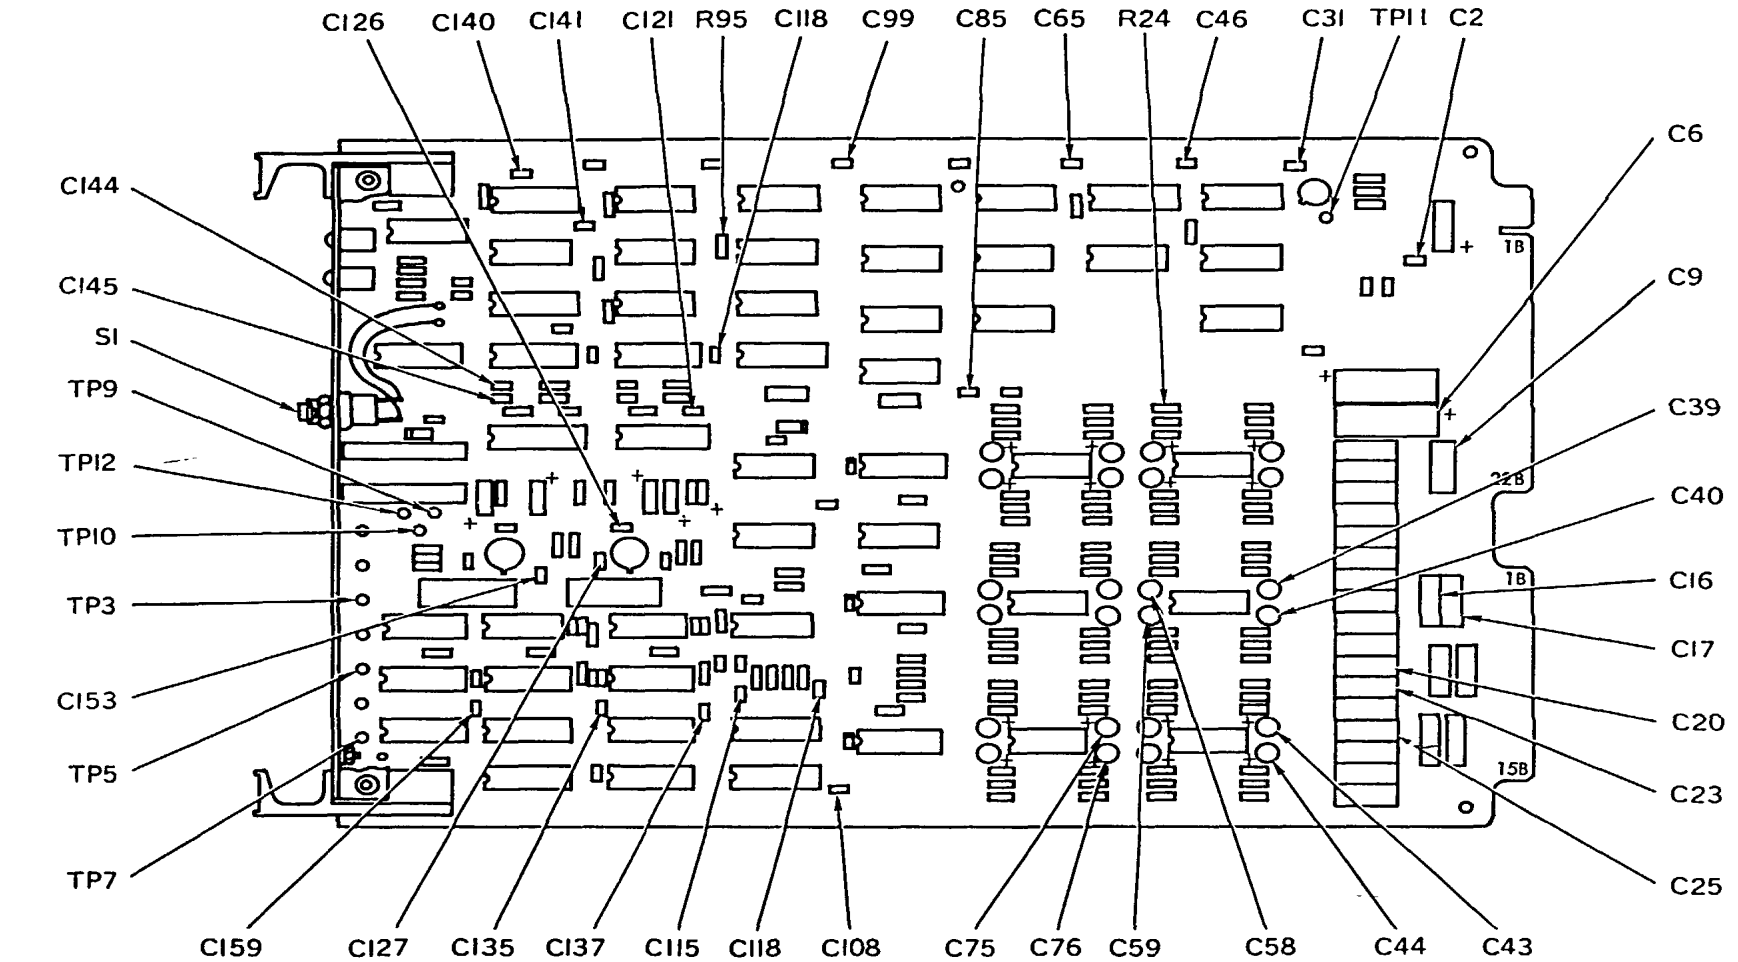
PCM unit parts location diagram (sheet 4 of 14) PCM02 and PCM04.
